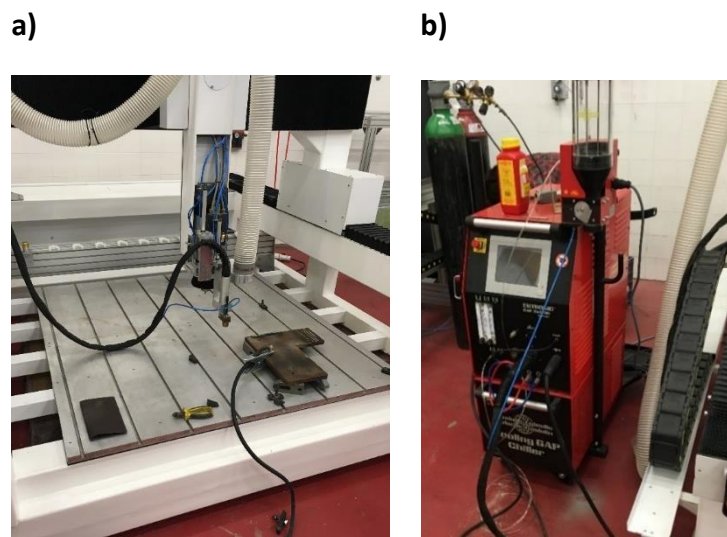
a) Experimental Setup Used b) PTA machine Setup
